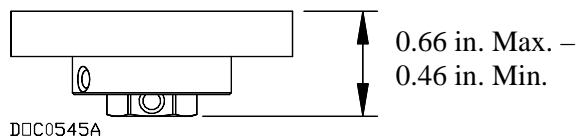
Magnet Installed on Short Shaft Adaptor
